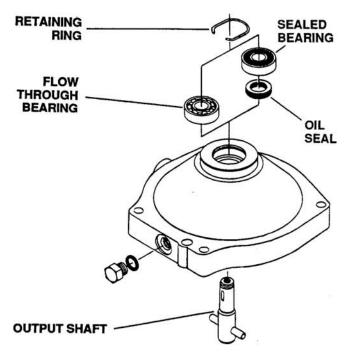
Assembly of Bearings, Oil Seal, Retainer Ring and Body
